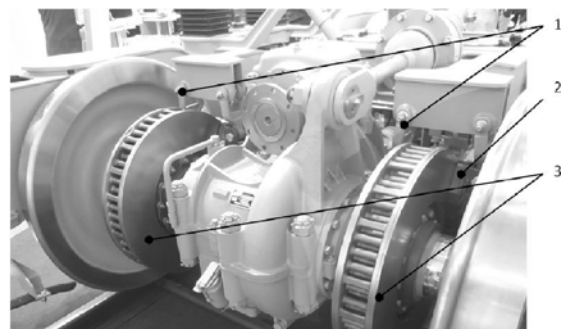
Railway disc brake on the two-axle bogie: 1 – level mechanism, 2- friction pad, 3 – brake disc
